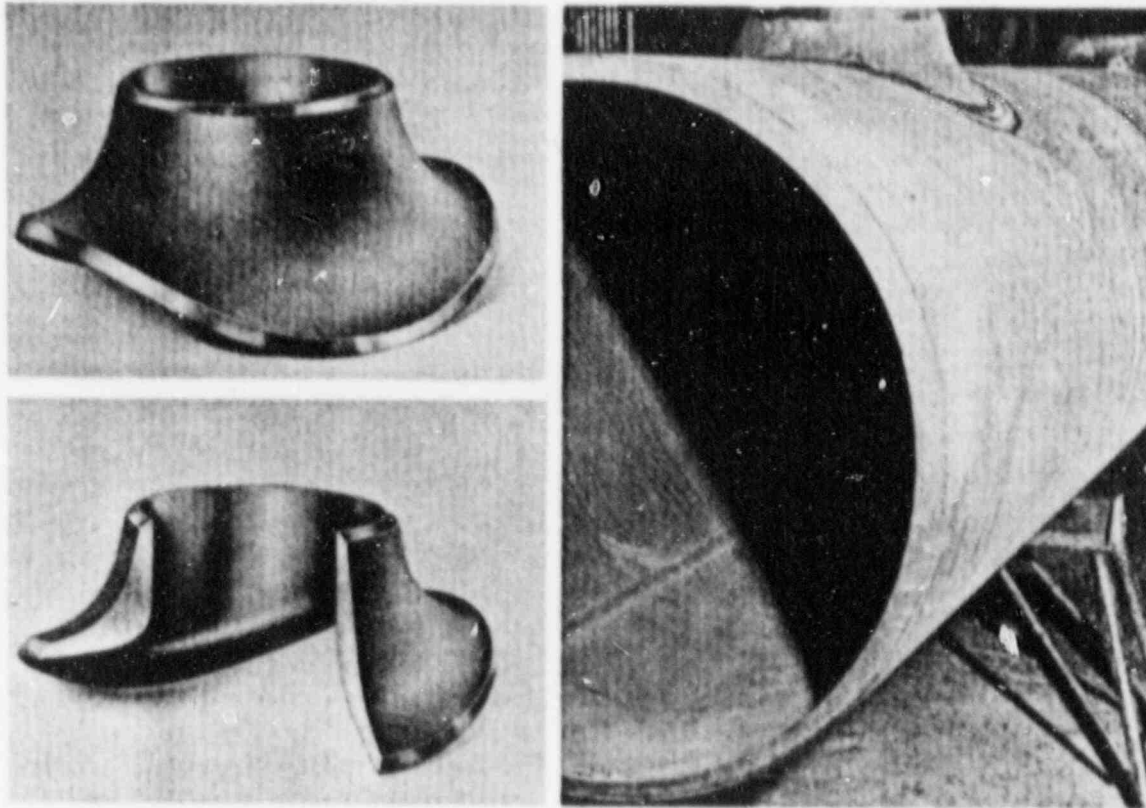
Specialty product branch connection insert Sweepolet, made by the Pressure Fittings Div., Gulf and Western Manufacturing Co. (formerly Bonney Forge, Inc.).
